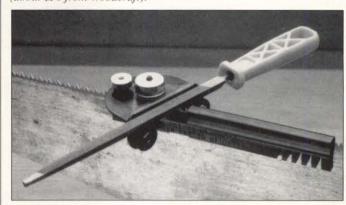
Hand saw sharpener (About \$20) from Woodcraft)
